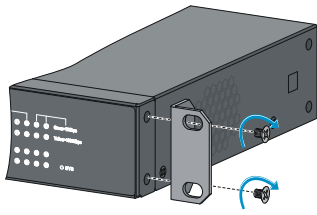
Attaching a two-hole mounting bracket to the rear mounting position on an HP 1950-24G-2SFP+2XGT switch
